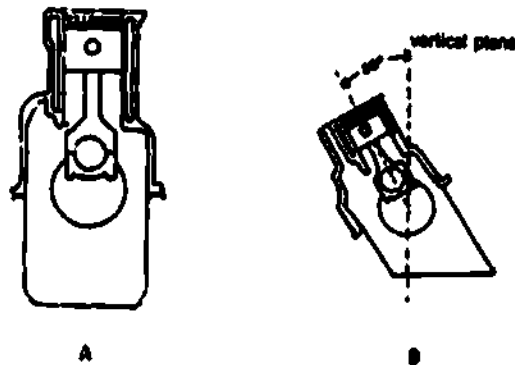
Partial cutaway front view of the cast en bloc six-cylinder engines.
